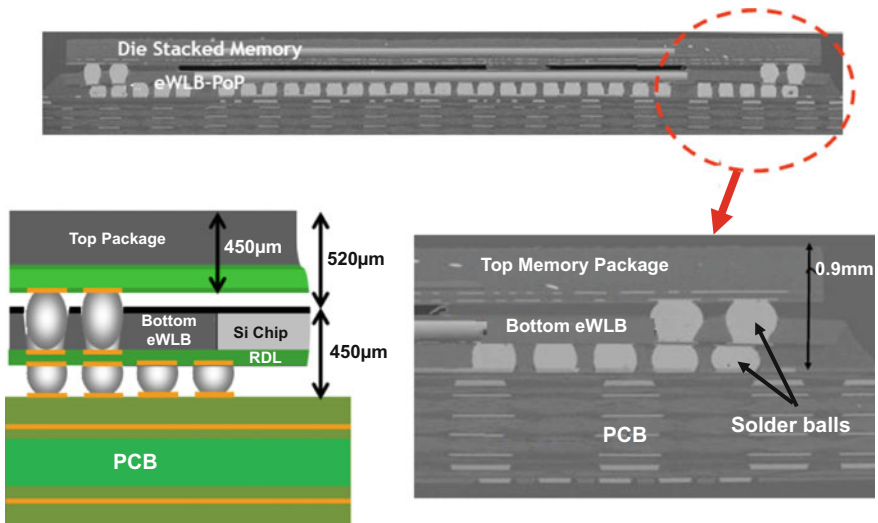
3D IC packaging (STATSChipPAC's package-on-package.) Memory package on top and eWLB package for the application processor at the bottom
